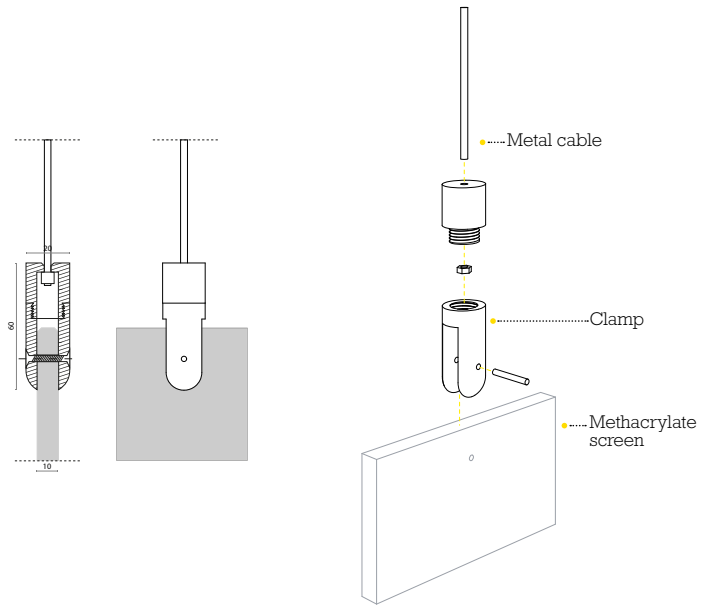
Construction detail - Joint for attachment of display panels | Axonometric exploded view and sections.
